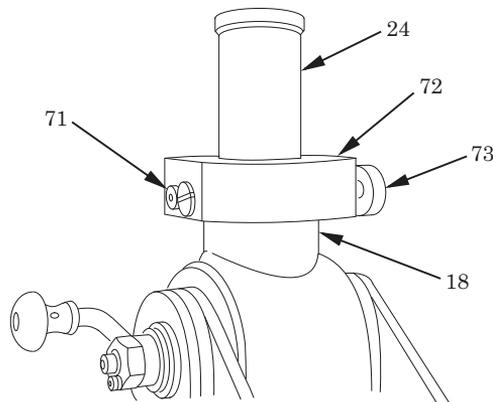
Drilling of Hole in Mechanical Drive Housing.
